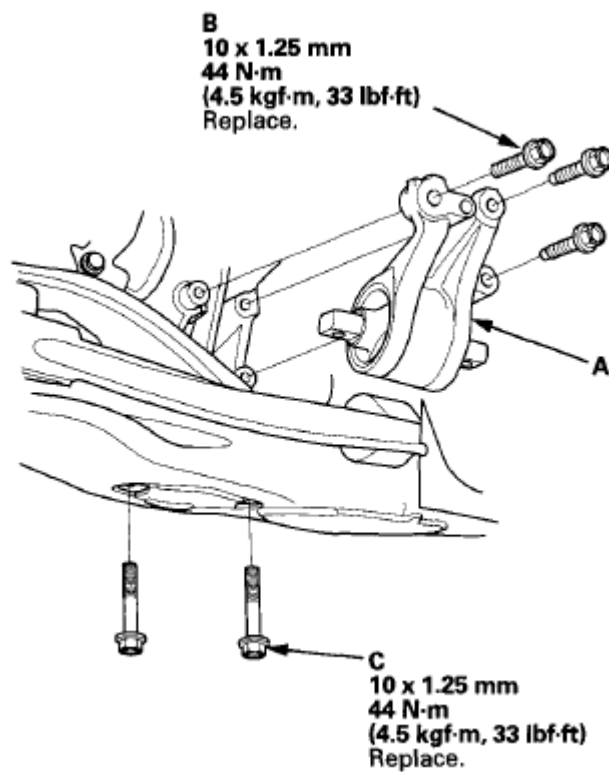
Installing Lower Transmission Mount With Torque Specifications
